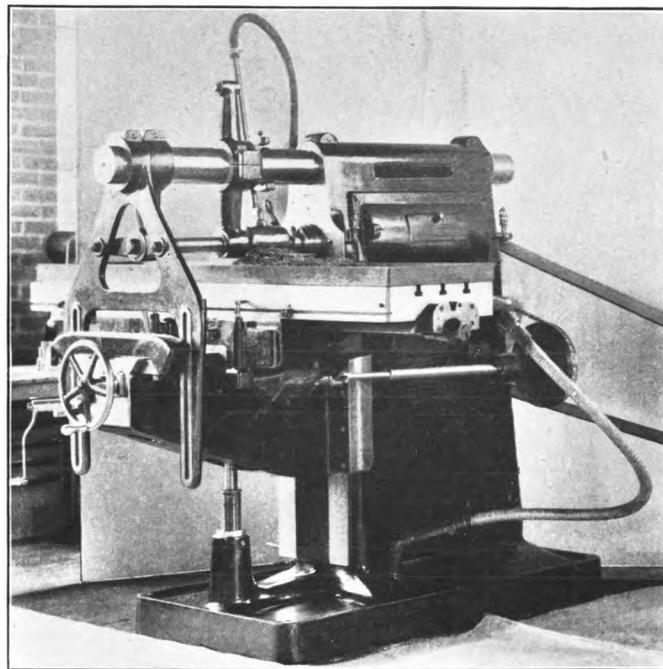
MILLING MACHINE, WITH GUARDED CUTTER.
